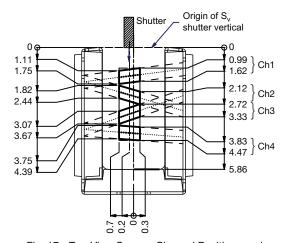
Top View Sensor, Channel Positions and Origin of Vertical Shutter, tolerances \pm 0.2 mm
